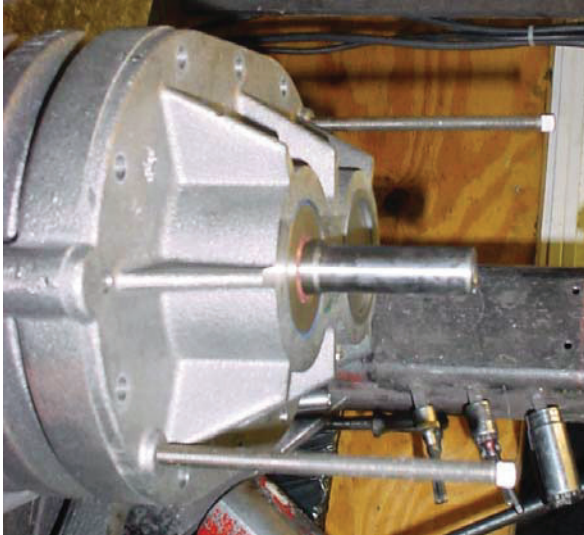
Removing Drive End End Plate Using Jackscrews (21 Series)
